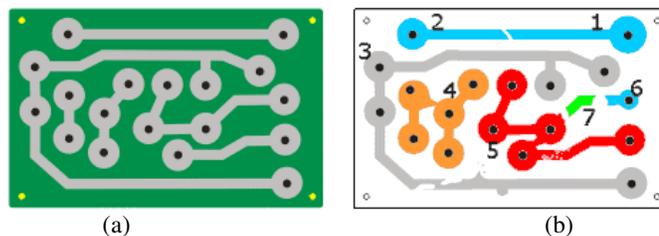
(a) Standard PCB. (b) Inspected board final result.
